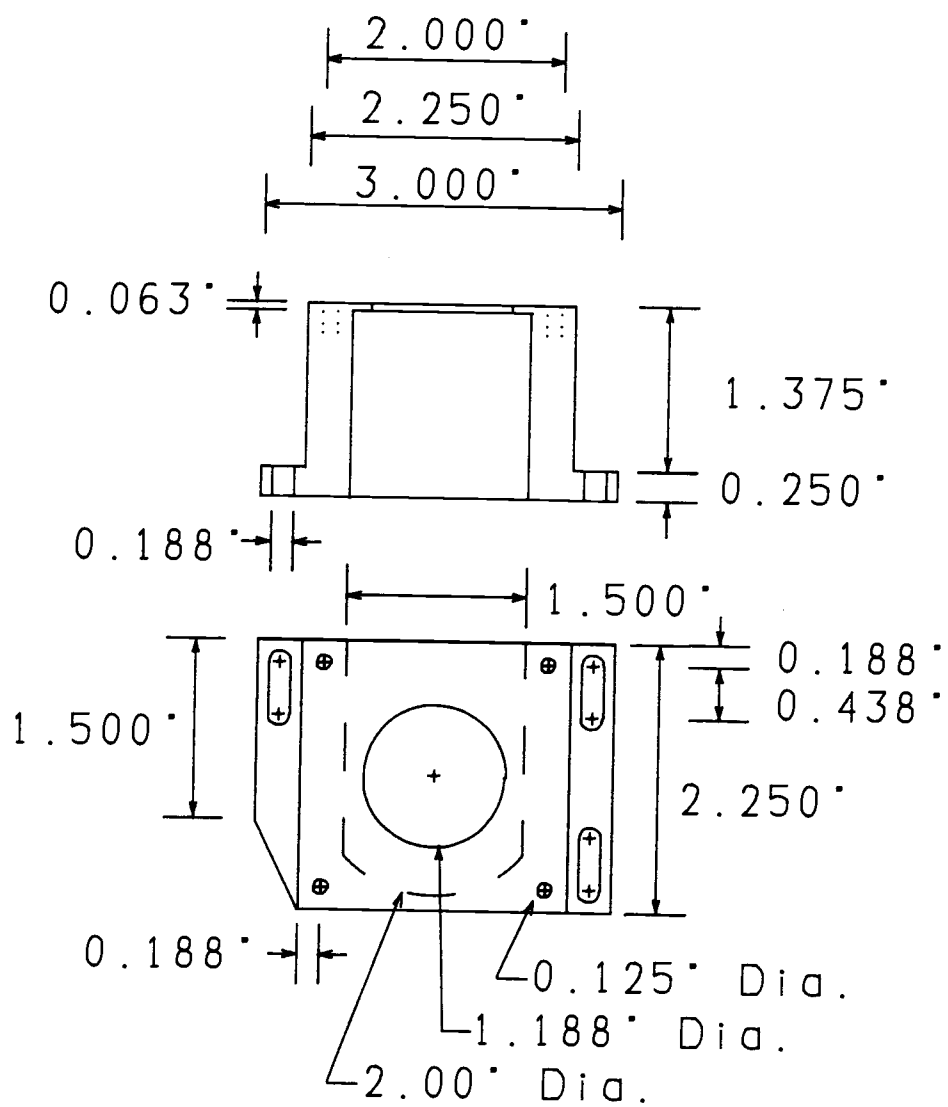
UV doubling crystal stepper motor mounting bracket.
